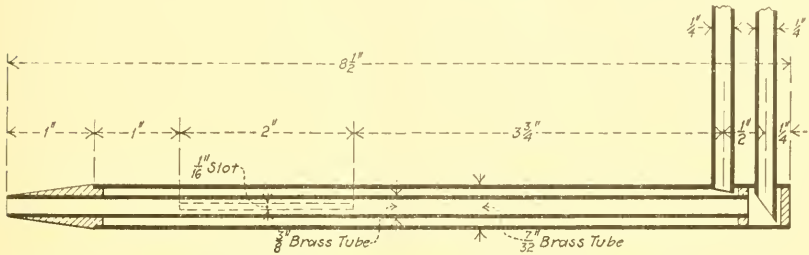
DIMENSIONED SKETCH OF PITOT TUBE X
